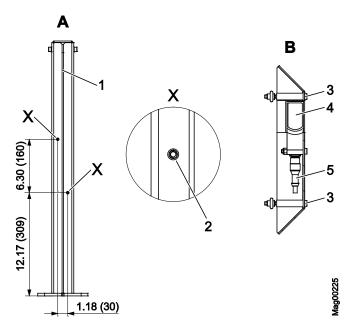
Assemble the receiver's light barrier housing on the post Dimensions in inch or feet are without parenthesis.
